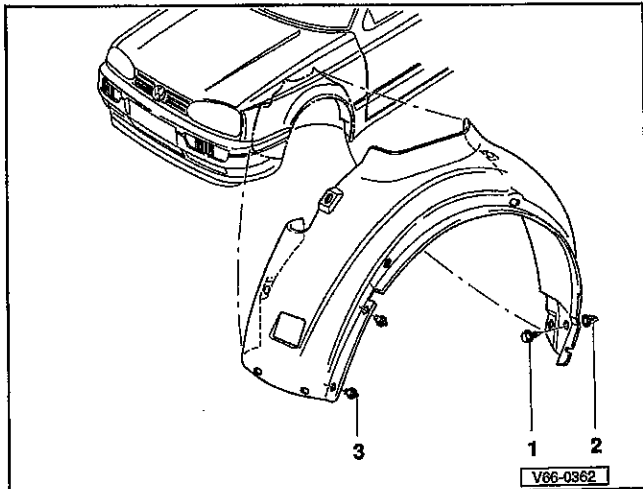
Wheel housing liner mounting screw (1), expander nut (2), and expander rivet (3).
